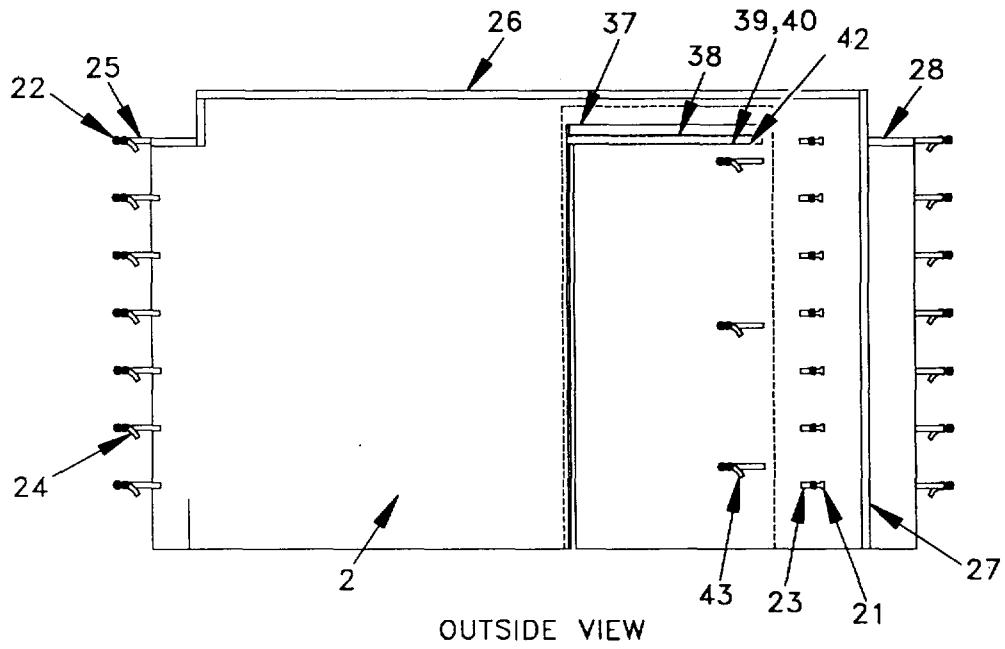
Entrance Way Wall Assembly (Sheet 2 of 5)
